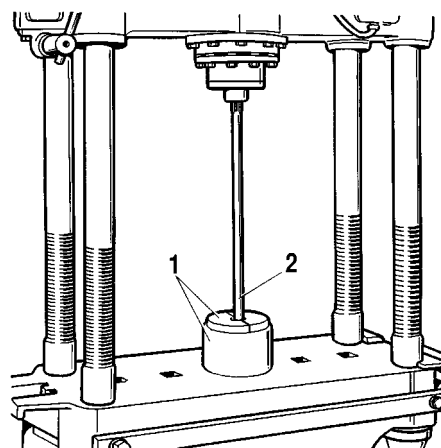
Pressing out the axle shaft bearing stop ring:
